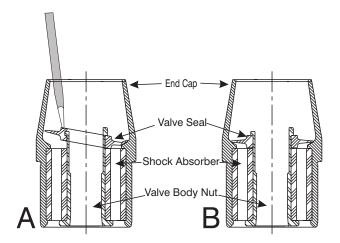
Press Valve Seal onto the Valve Body Nut .
